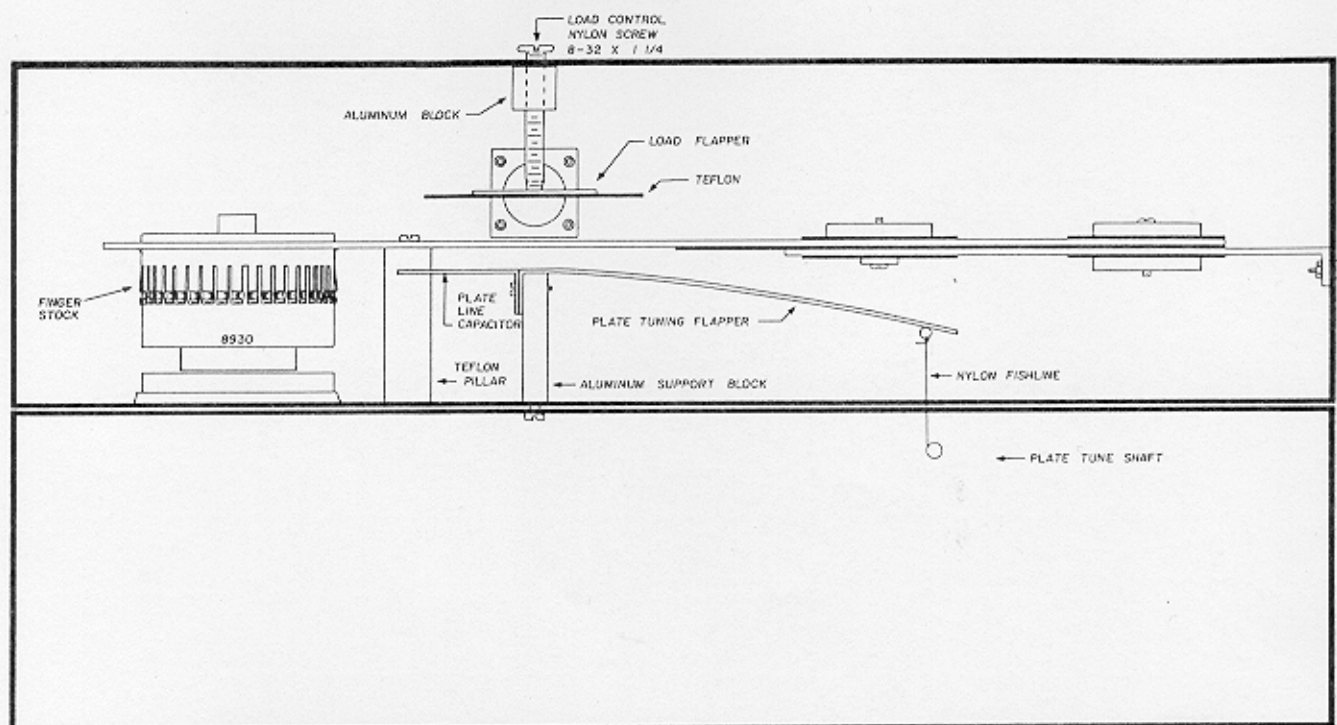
Cross-sectional view of the two-meter kilowatt showing the location of the plate circuit components.
